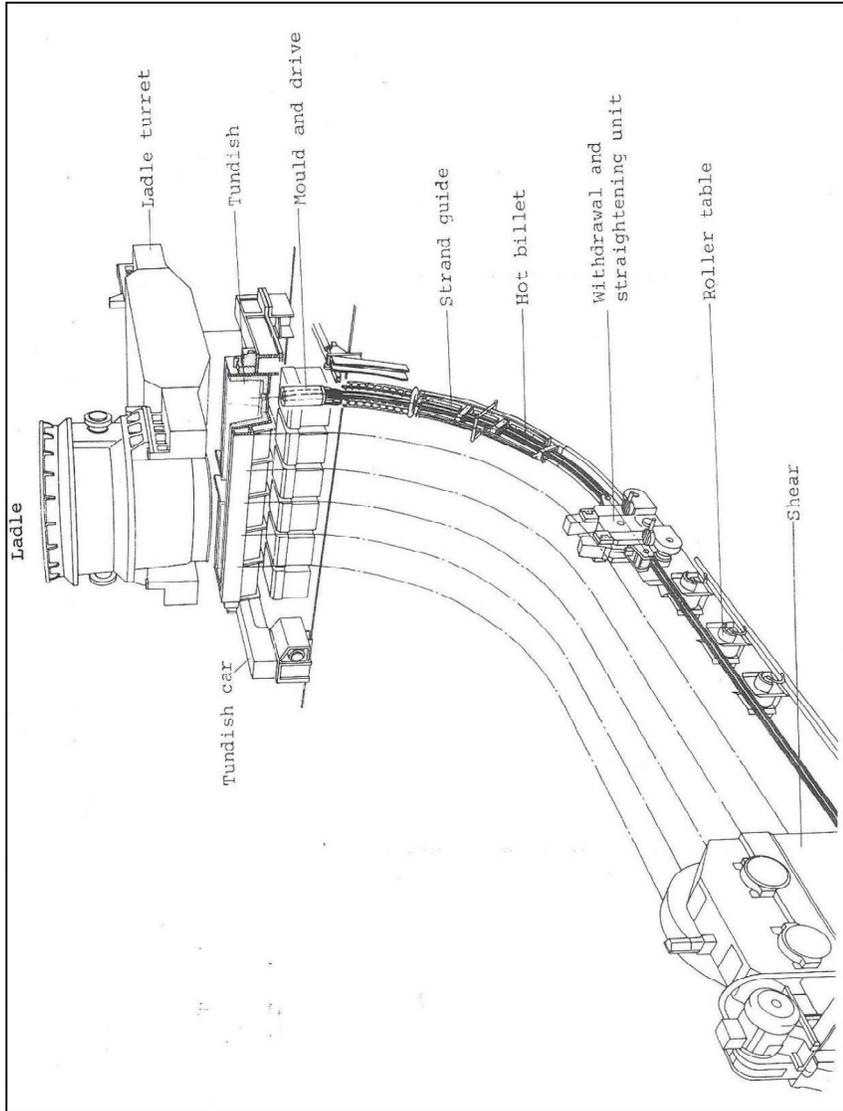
Six strand continuous casting machine. Source: DSC Orientation Course Part 2, 1980
